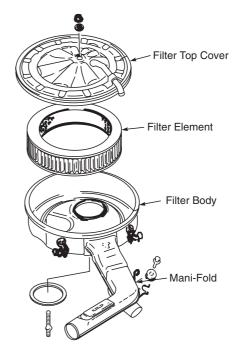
Exploded View of Air Cleaner (*Courtesy:* Maruti Udyog Ltd.)
